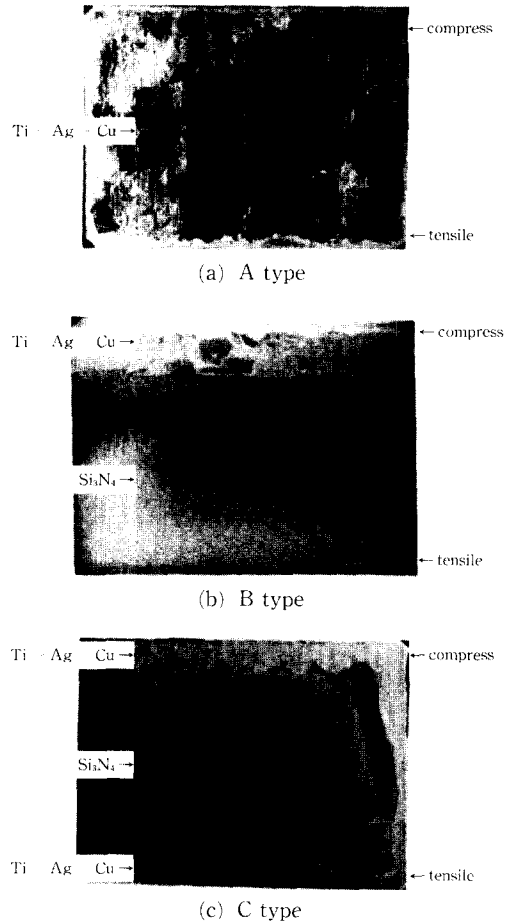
Photographs of fractured plane by 4-point test of ceramic/metal joint
